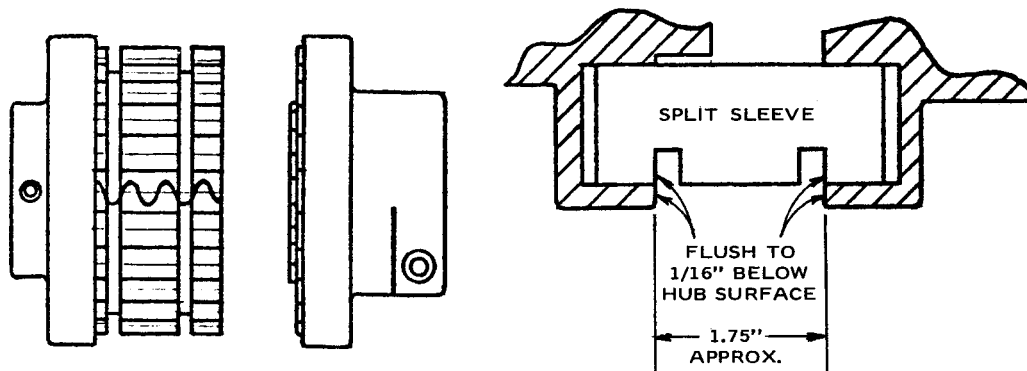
INSTALLATION OF SPLIT SLEEVE
